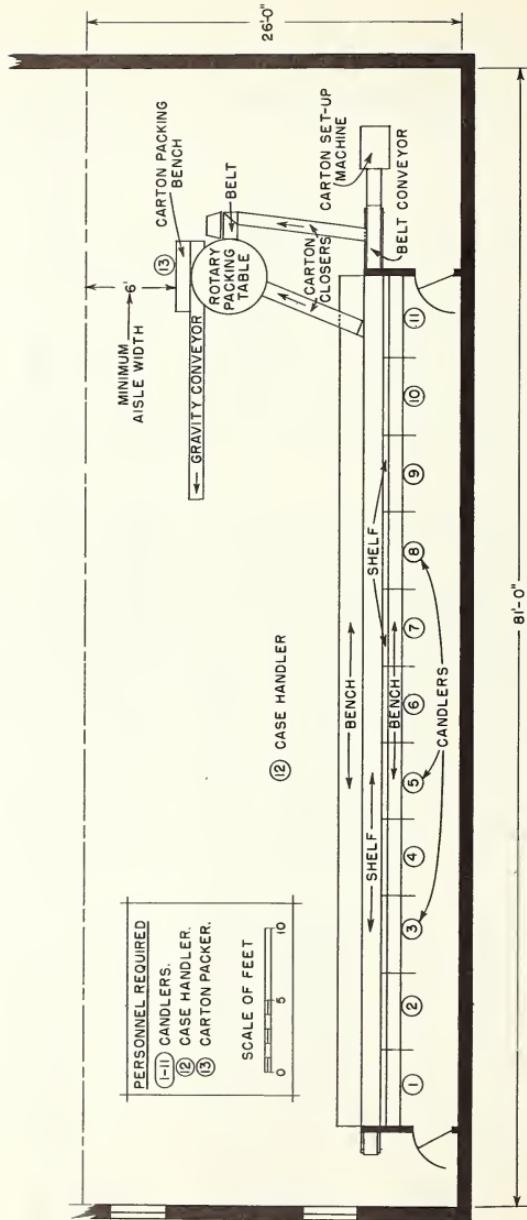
Layout of belt conveyor system A with two types of carton closers.
